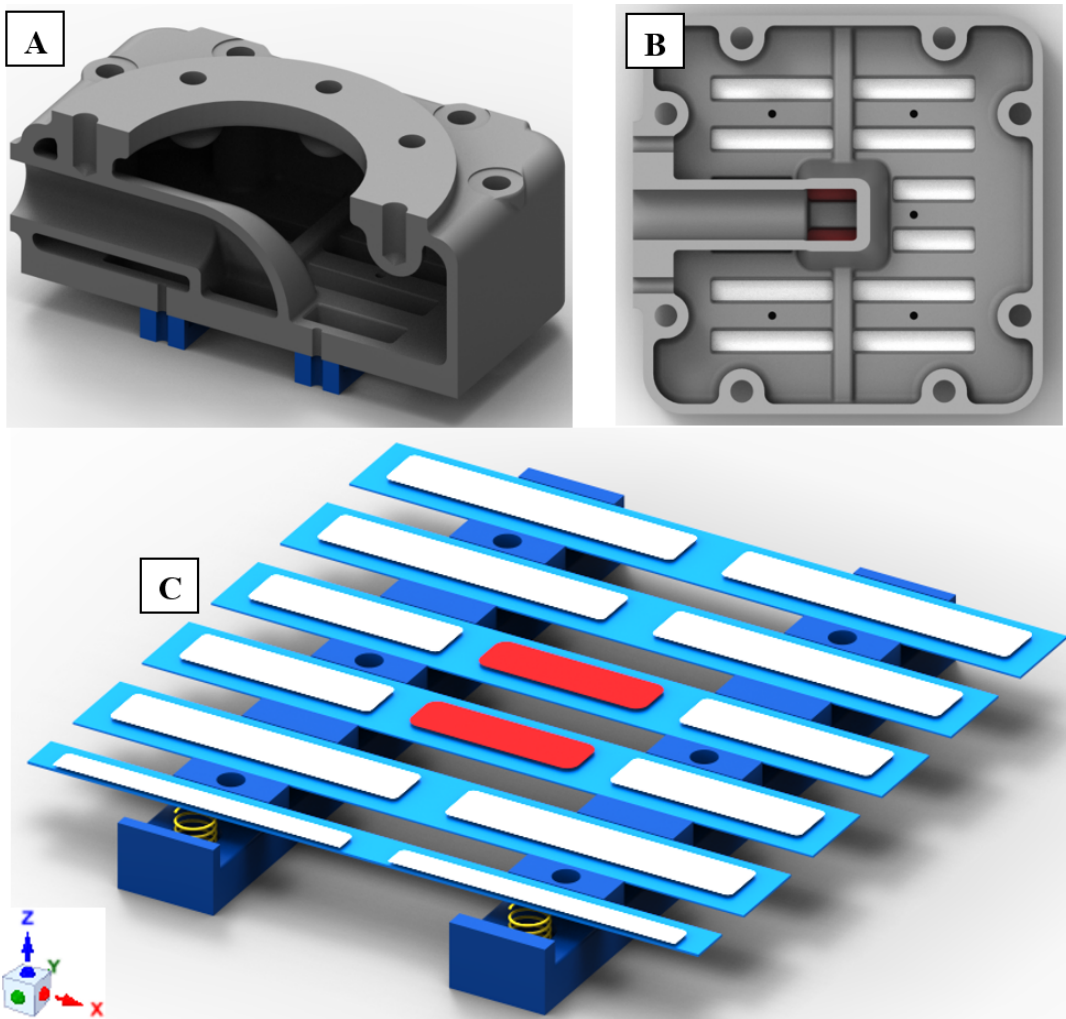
Reed valve parts; (A) vertical-cut view, (B) horizontal-cut view, (C) spring-loaded strips, with one half-cut view strip
